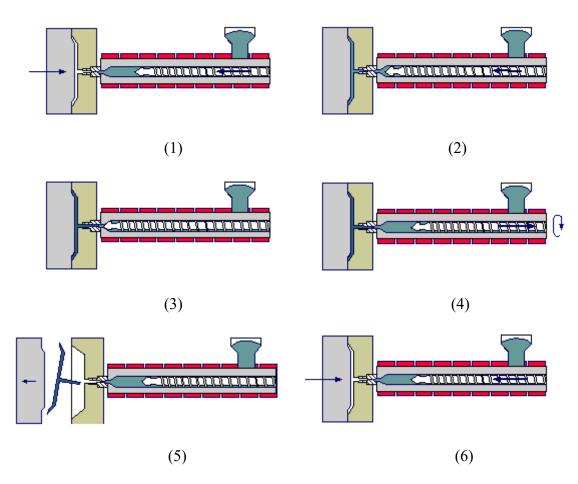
Cycle for Reciprocating Screw Injection Moulding Machine [4]
